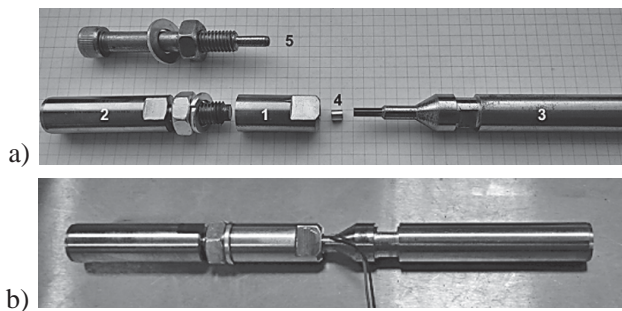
Experimental test of a backward extrusion: a) tool kit to the test - 1) die, 2) locking screw at the bottom of the die, 3) punch, 4) specimen $\text{Ø}5 \times 5 \text{ mm}$, 5) ejector, b) assembly of tool kit with the sample inside.
